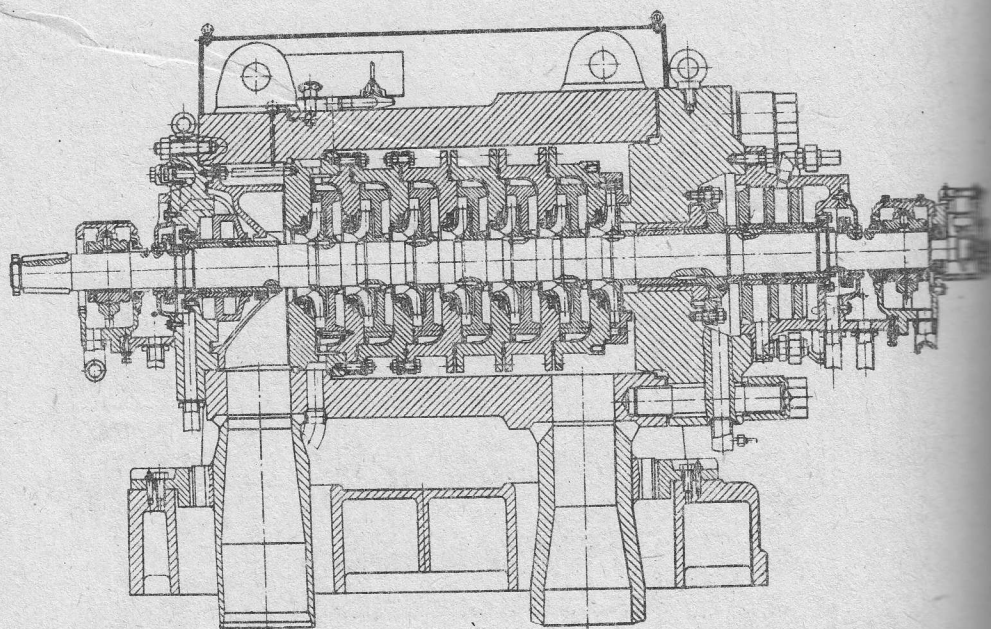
An impeller pump with non-sectional casing, type PE600-300-3 (USSR)
